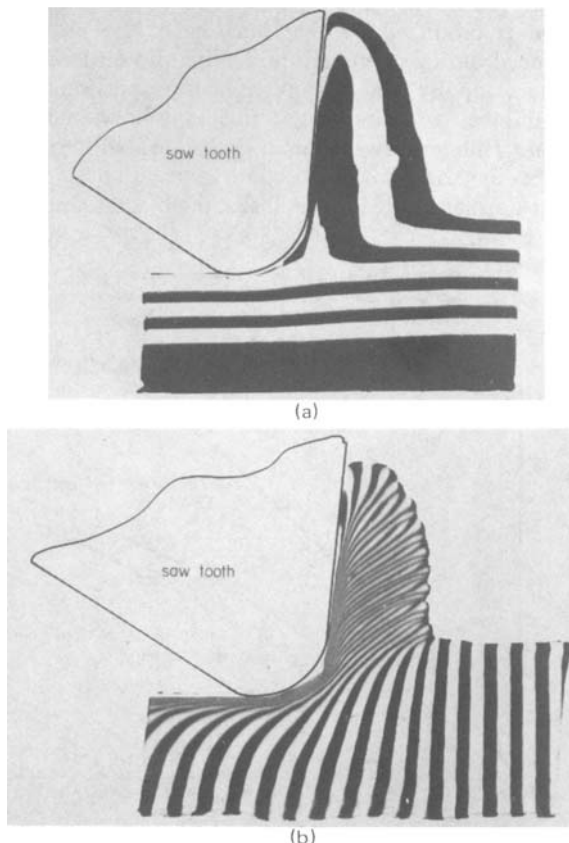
Deformation produced by a tool having a cutting edge radius larger than the depth of cut, (a) horizontal grid (b) vertical grid.
